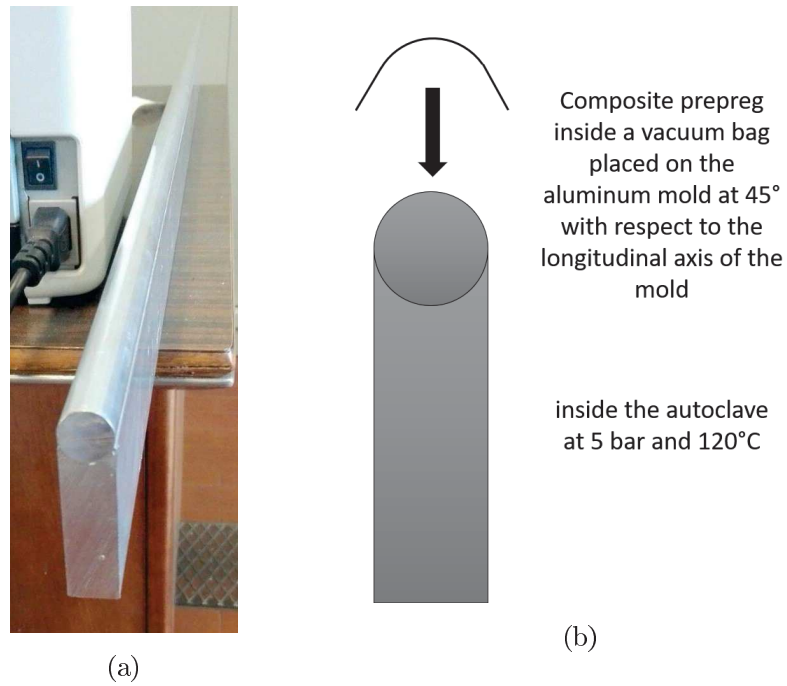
(a) Photo of the mold used to manufacture the bistable boom and (b) sketch of the manufacturing process.
